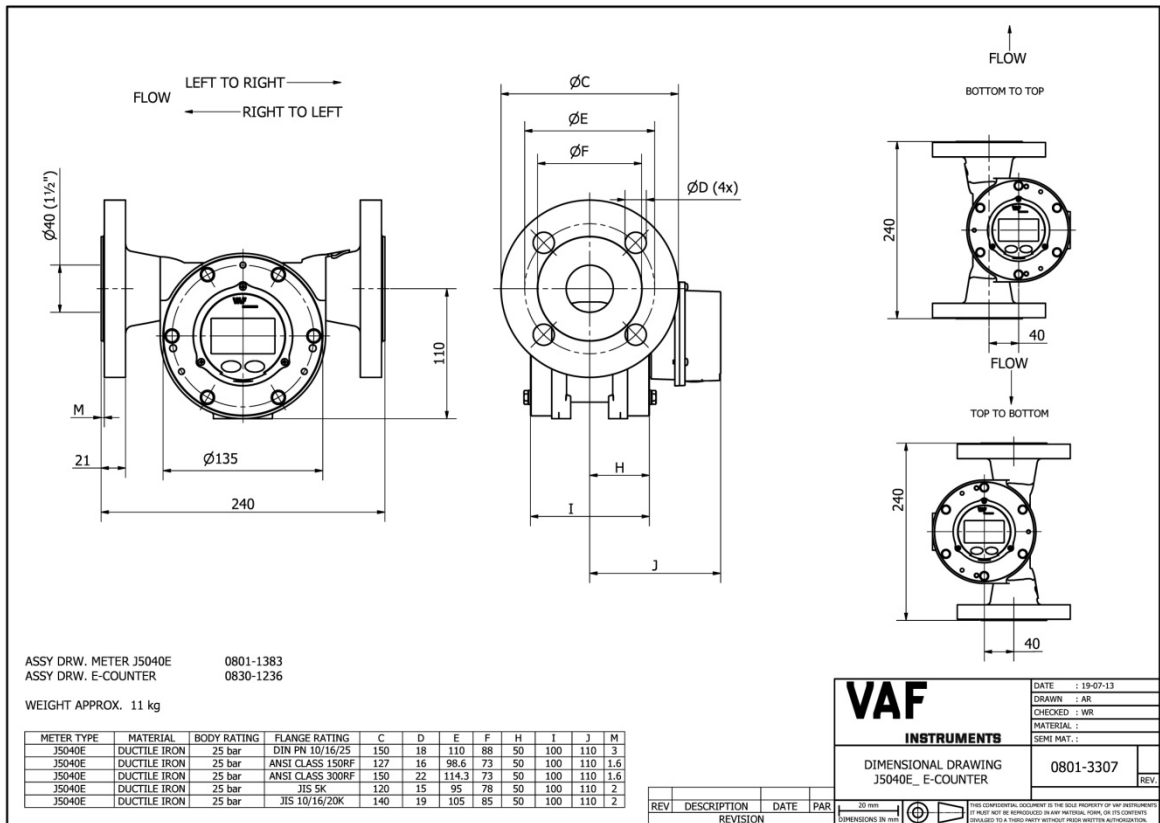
Drawing 0801-3307 – Dimensional drawing J5040E E-counter
